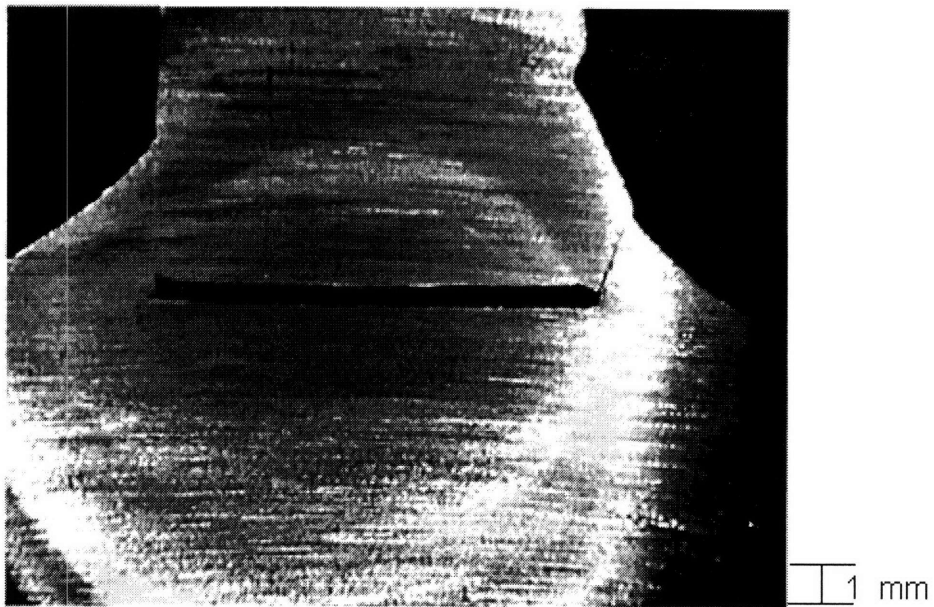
Specimen 2 cross sectional view of the fillet weld after fracture
